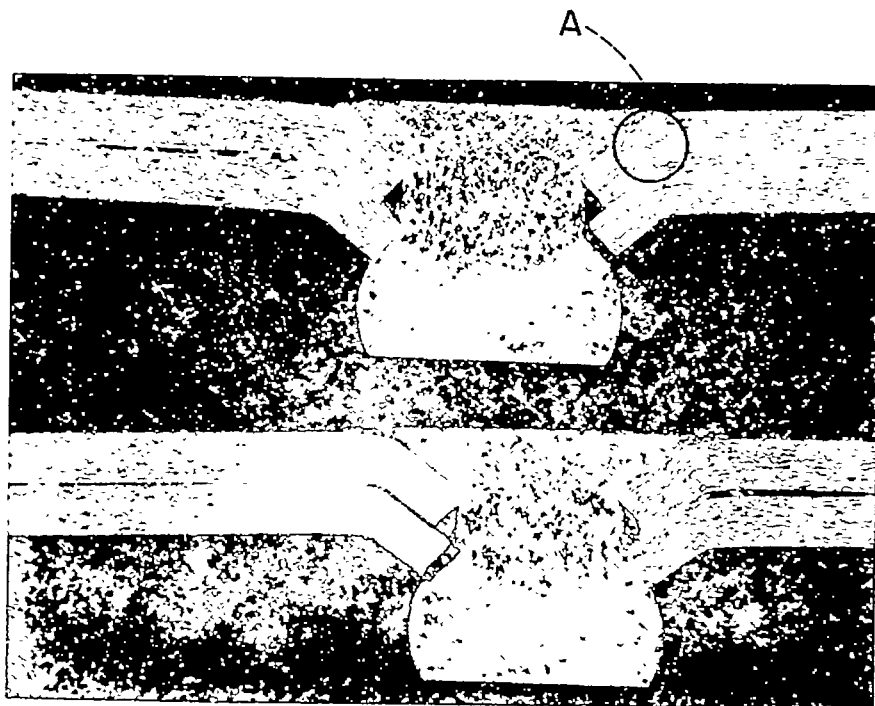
Section of dimpled joints in 0.032-inch 75S-T6 aluminum-alloy sheet after fatigue failure. Cracks shown at A. X8.
